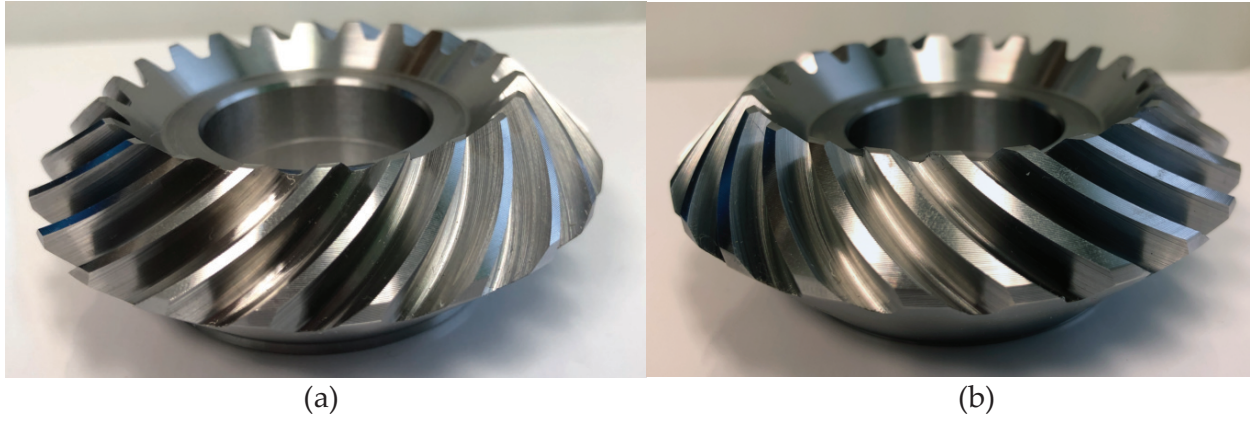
Manufactured parts of the given design: (a) pinion and (b) gear.
